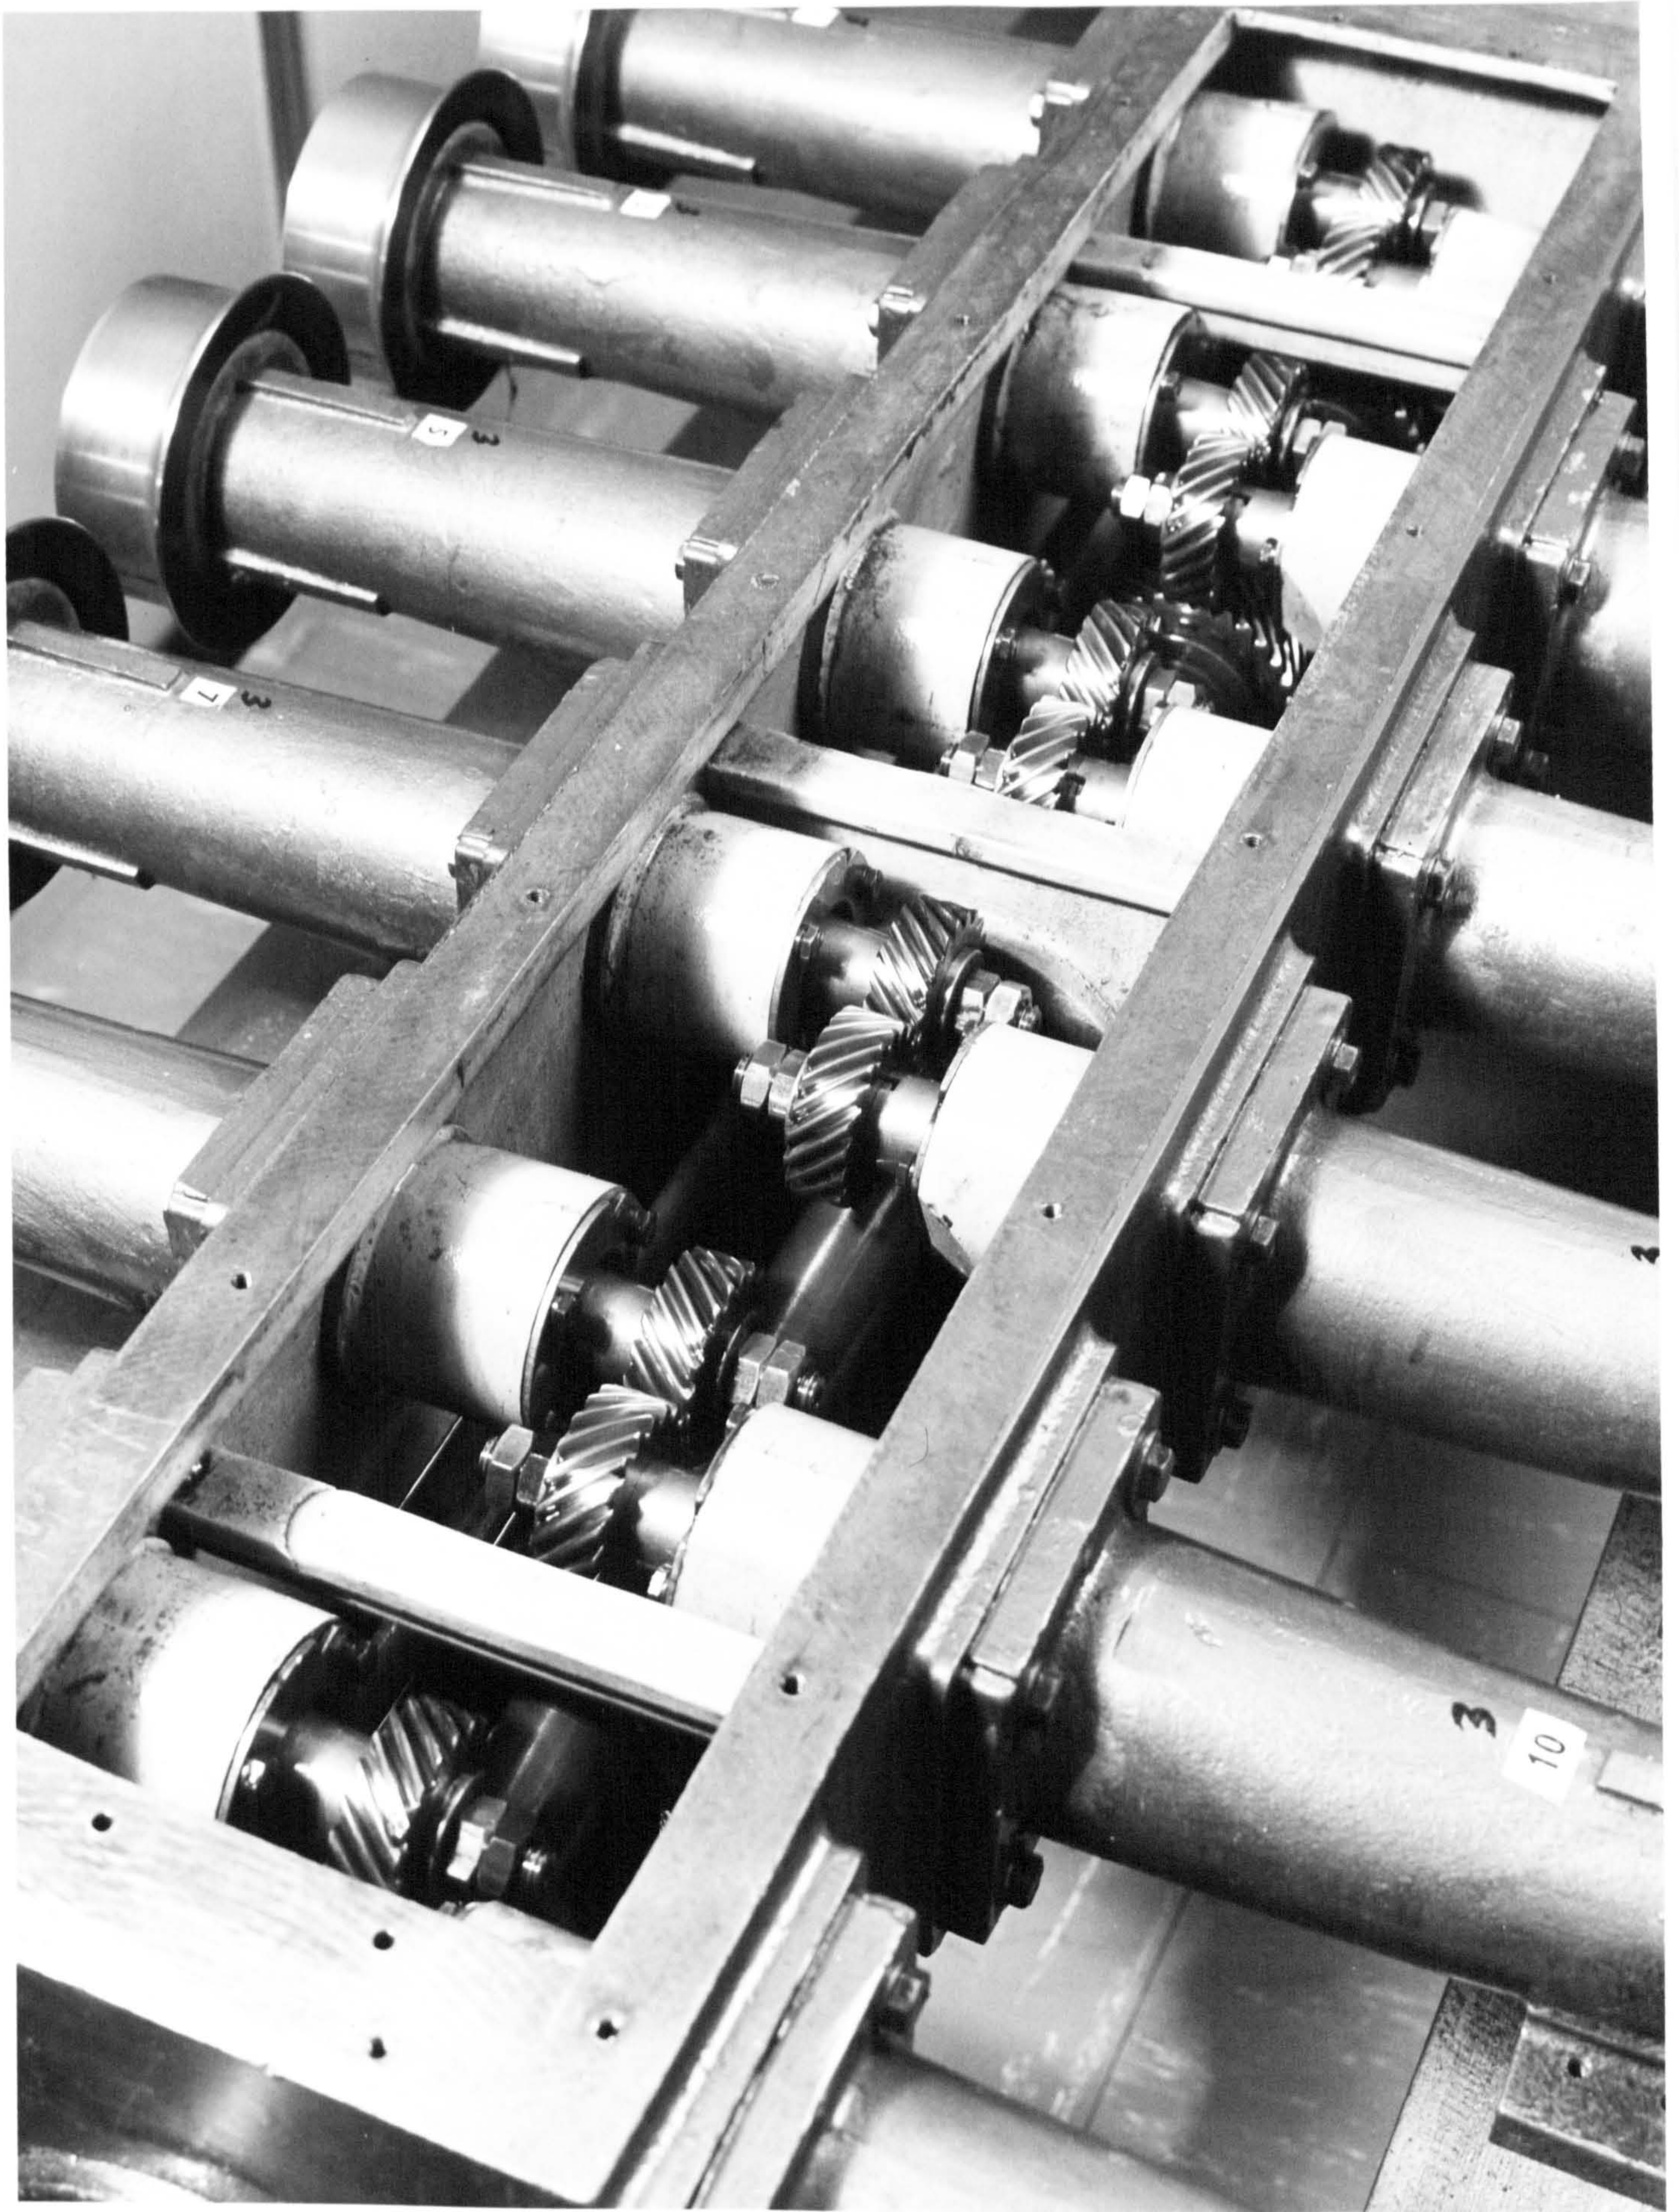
General View of MDT. Drawbox (cover removed)
